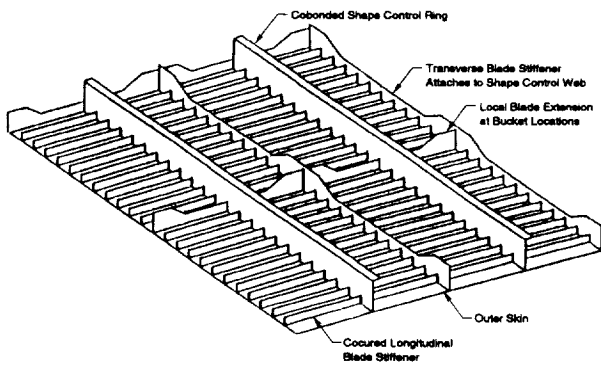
Trimetric of cold skin with integral fuel tank construction (ref. 7).
